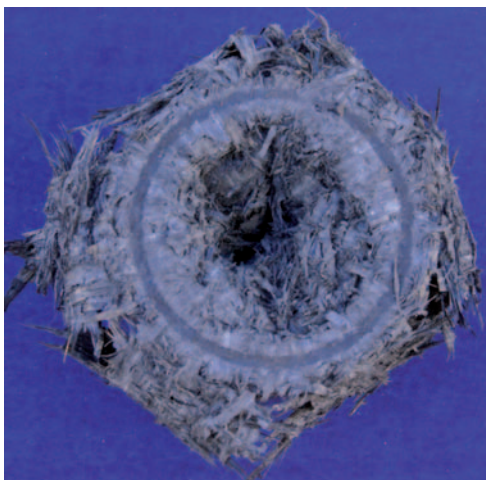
The debris wedge and failed material in the center of the tube formed during 45 chamfer tests of carbon/epoxy.
